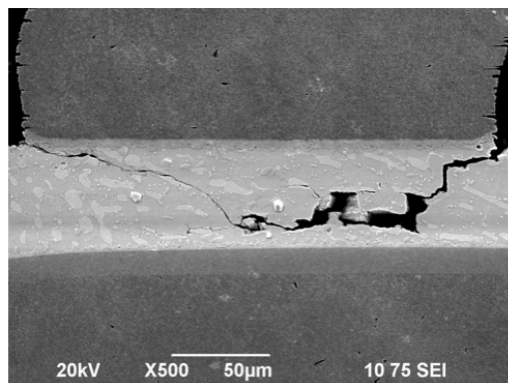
SEM image of solder joint Pin32 in Component AT30 on Board T10
